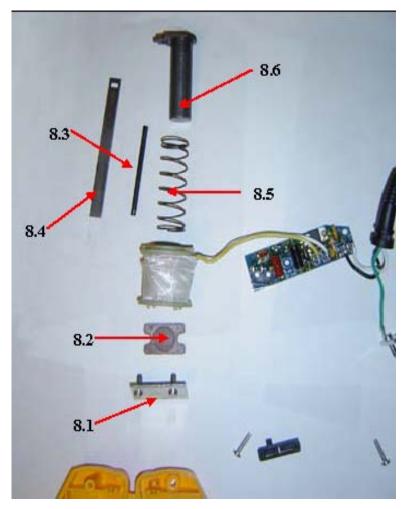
Exploded View of Electro Magnet Sub Assembly (Module 3) (Source Prof. Sridhar Kota, University of Michigan, Ann Arbor, MI)
